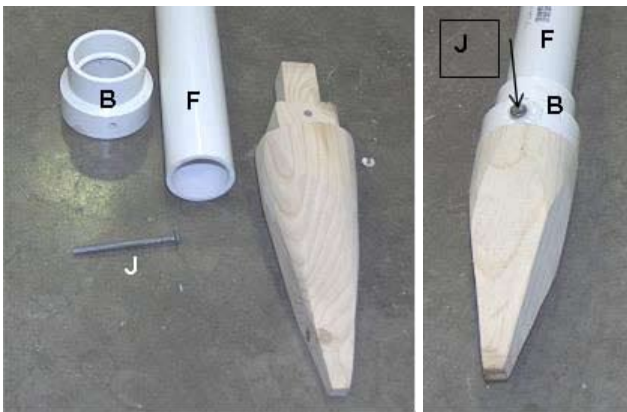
Dibbler ram shaft (a) components and (b) assembled.
